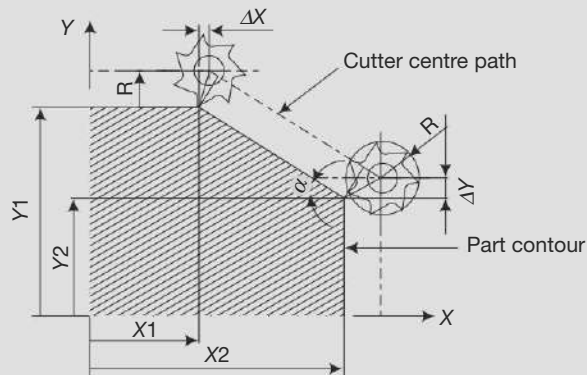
Offset Tool path for machining contours that are not parallel to the principal axes
